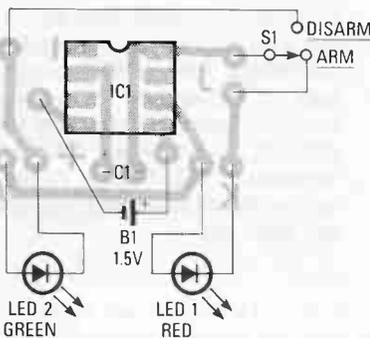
THE CIRCUIT CAN BE BUILT on a tiny PC board. The pattern is provided in our PC Service section.
